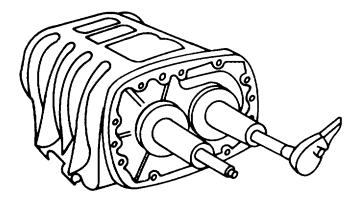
End Plate Removal Using Tool Set J6270F.
